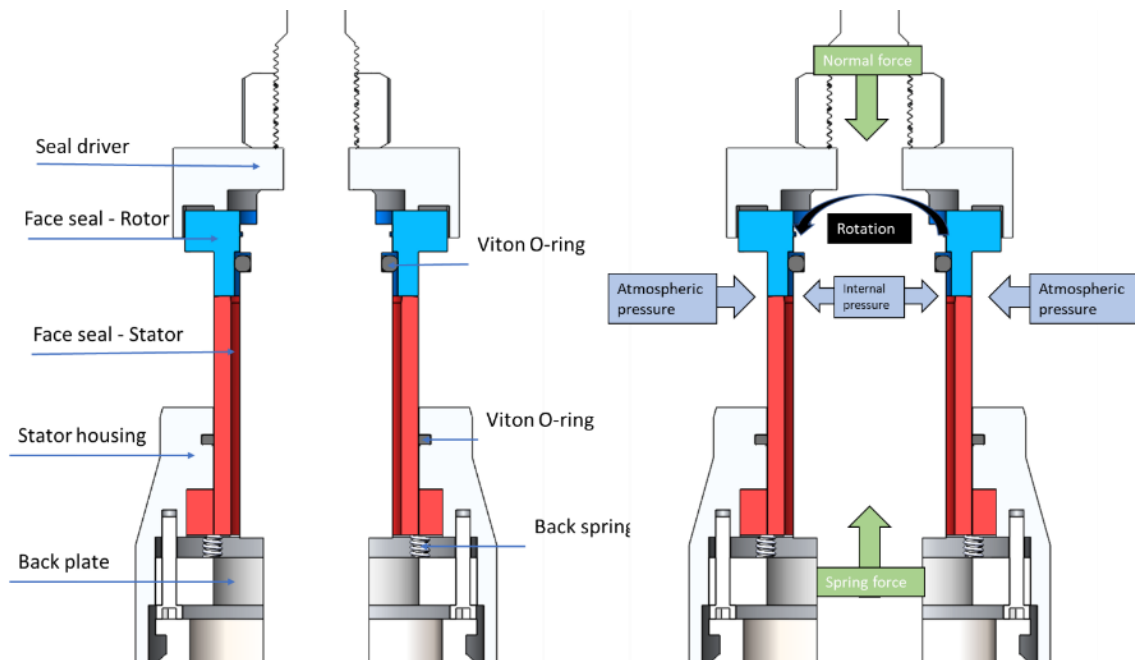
Schematic of the assembly for face seal testing. The stator (red) is held in place while the rotor (blue) is free to move.
